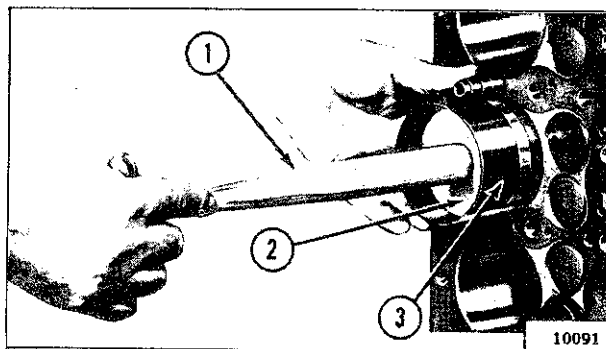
INSTALLING PISTON AND CONNECTING ROD ASSEMBLY
